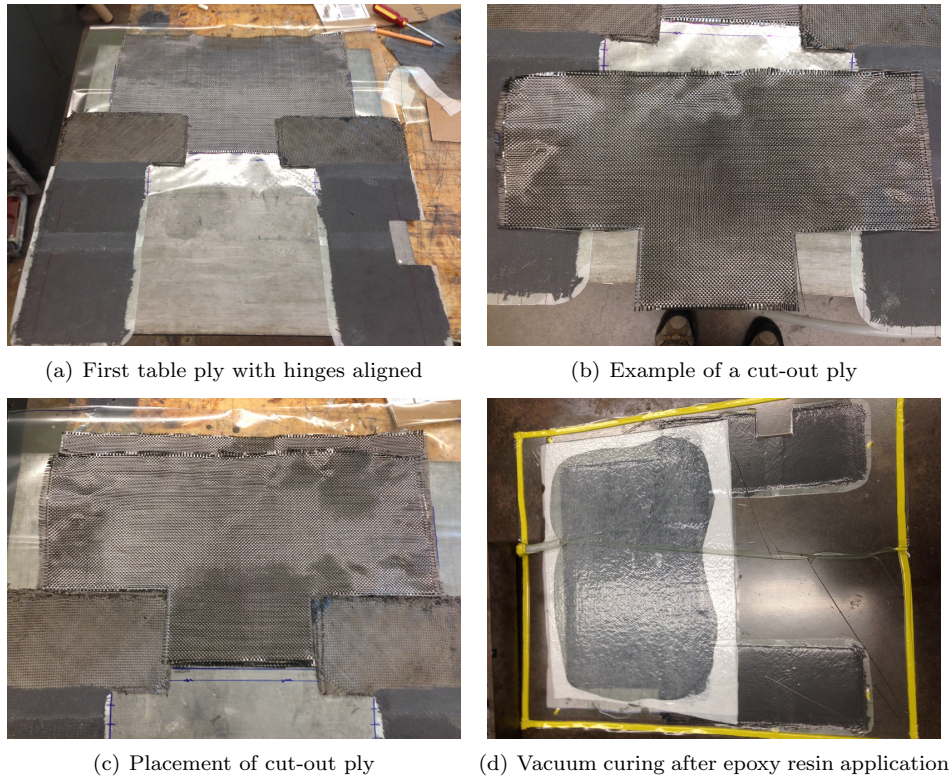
Final tray table fabrication process, incorporating the hinges into the overall structure. The laminate is initially over-sized so that the final cutting can be done more accurately.
